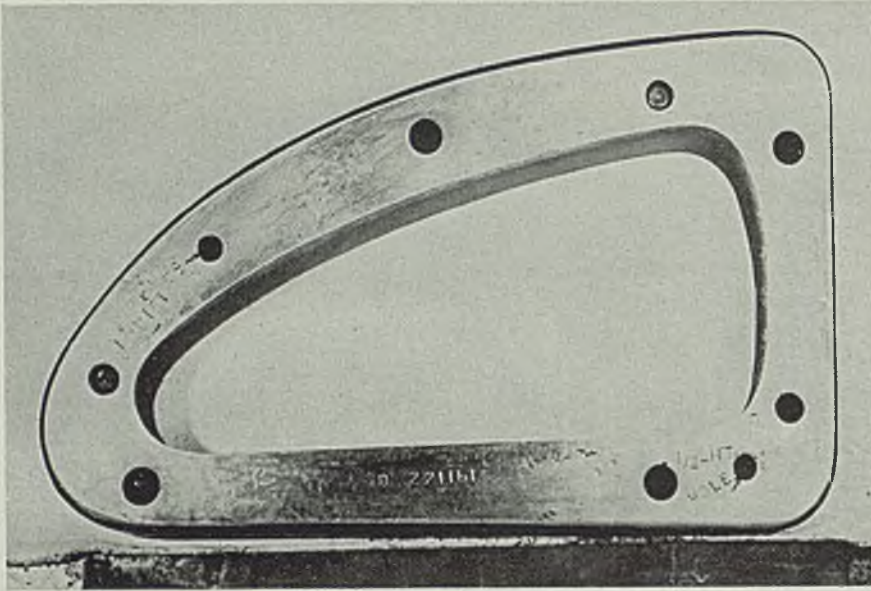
This medium-carbon-steel window-opening trimming and forming punch is an excellent example of inexpensive die construction. Tool steel electrodes deposited the hard inside trimming edge and the outside forming edge of this die
